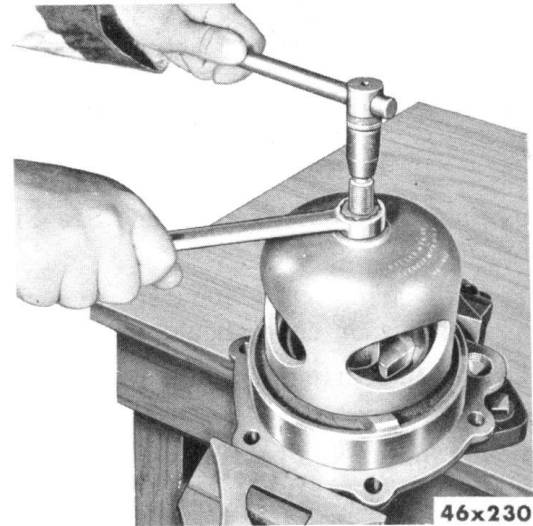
Installing Differential Cross Shaft Cap Bearing Cup—Tool DD-966
